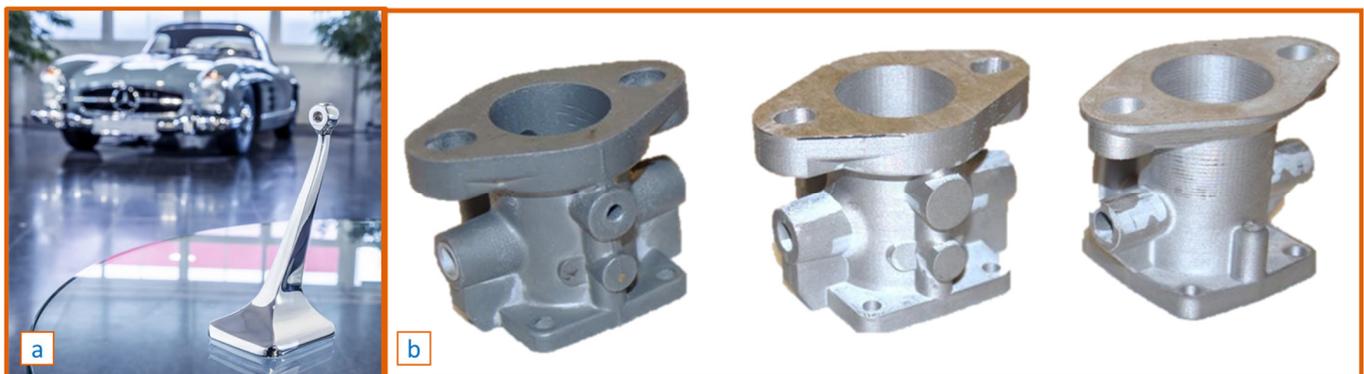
Metal spare-part reconstruction based on direct AM processes: (a) Mercedes 300 SL Coupè mirror base (photo credits: Mercedes-Benz Group AG). (b) Steyr 220 carburettor body (left), 3D-printed original design (centre), 3D-printed DfAM design (right) (photo credits: Tecron s.r.o.).
